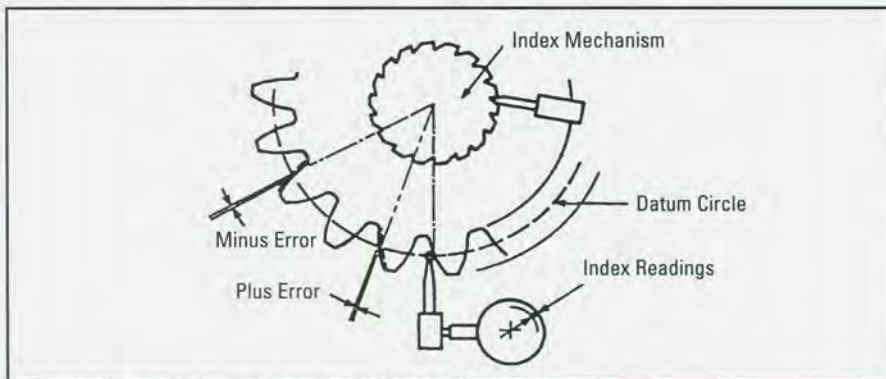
Single probe index testing. ©AGMA/ANSI 2000-A88.
